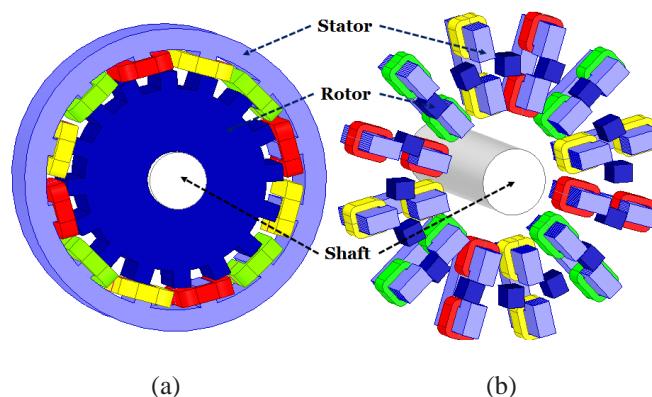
3D view of 12/16 (a) conventional RFSRM (b) proposed C-core RFSRM.
